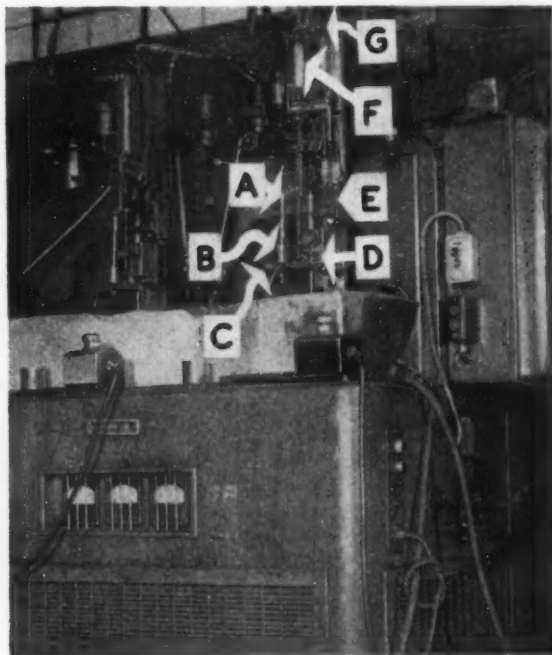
Tocco 9600 cycle machine. (A) Holding fixture, (B) centering bushing, (C) heating coil, (D) limit switch for power, (E) limit switch controlling travel, (F) air cylinder for scanning, (G) solenoid valve.
